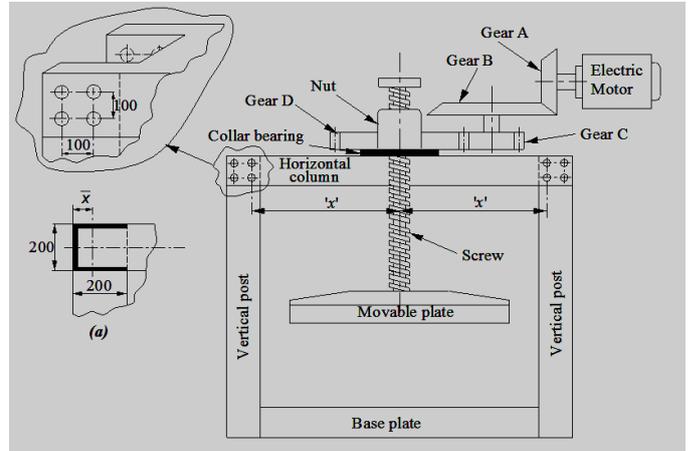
GENERIC DESIGNS DRAWING FOR POWER SCREW
